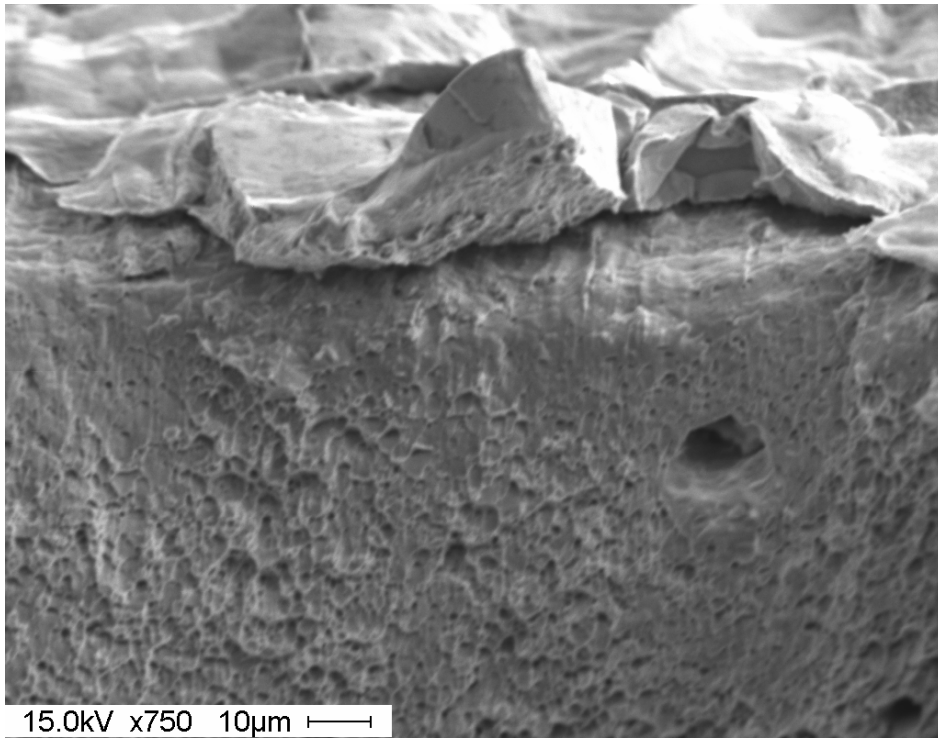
Quasi-static sample fracture surface closeup also showing the galvanized layer.
